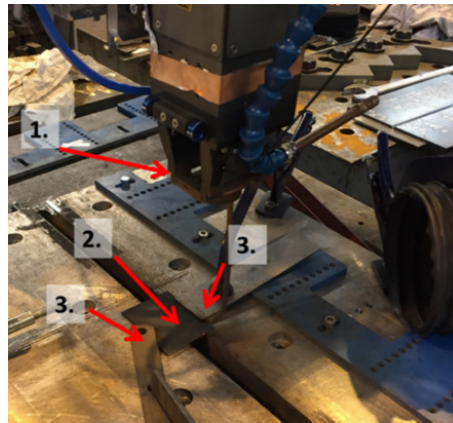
Laser welding setup; 1. laser welding head, 2. test piece, 3. clamping of the test piece.
